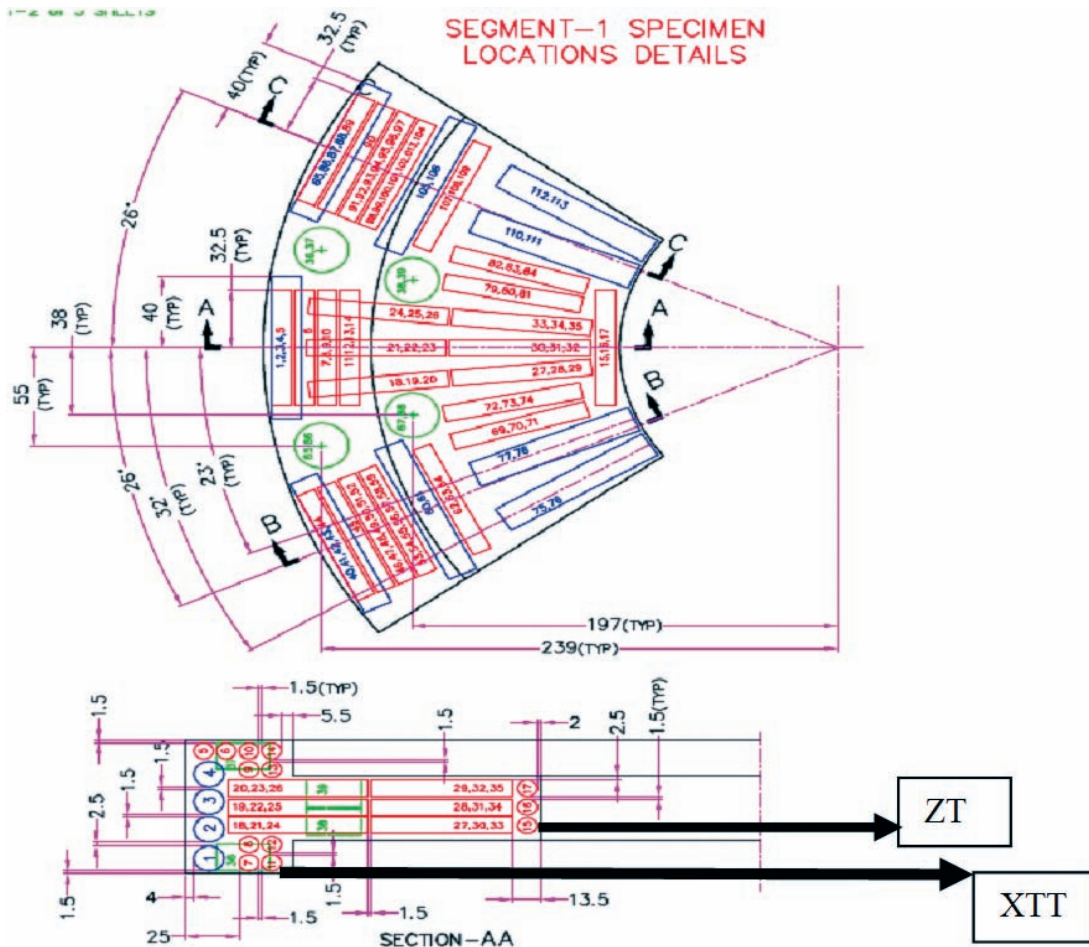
Segment 1 of the forging disk and its cross-sectional view locating rim and bore tangential specimens.
